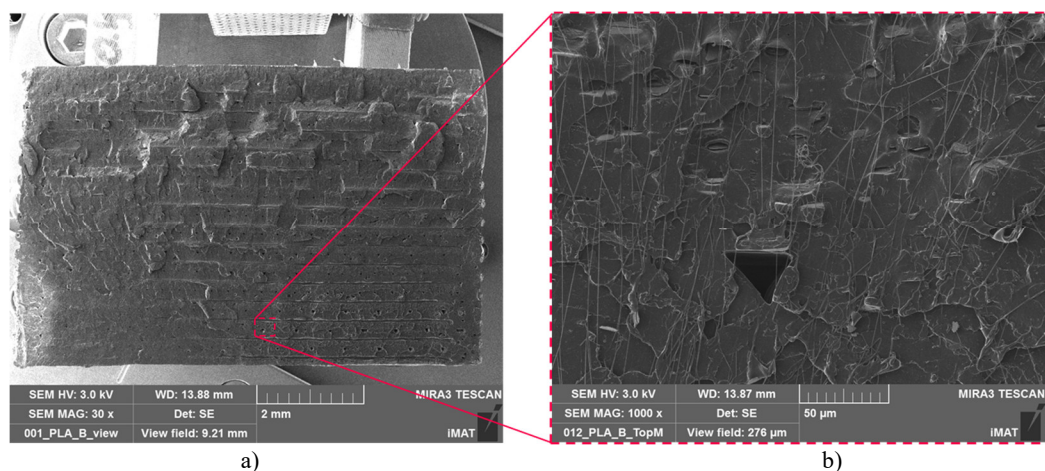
3-point bending test of bulk PLA a) PLA fracture surface b) string-like artifacts
